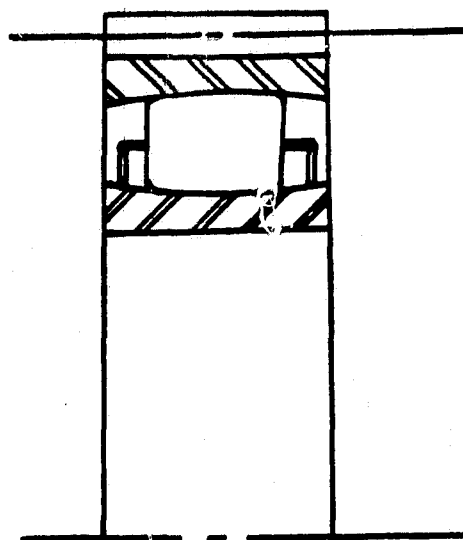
PLANET GEAR BEARING SIDE VIEW
